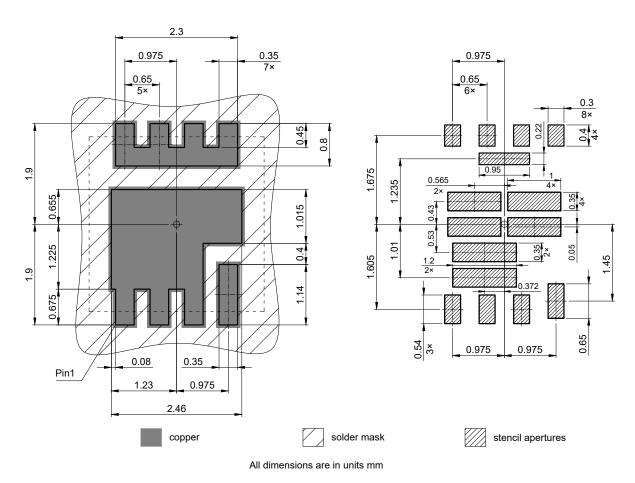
Outline Footprint (PG-WHSON-8-1), dimensions in mm
